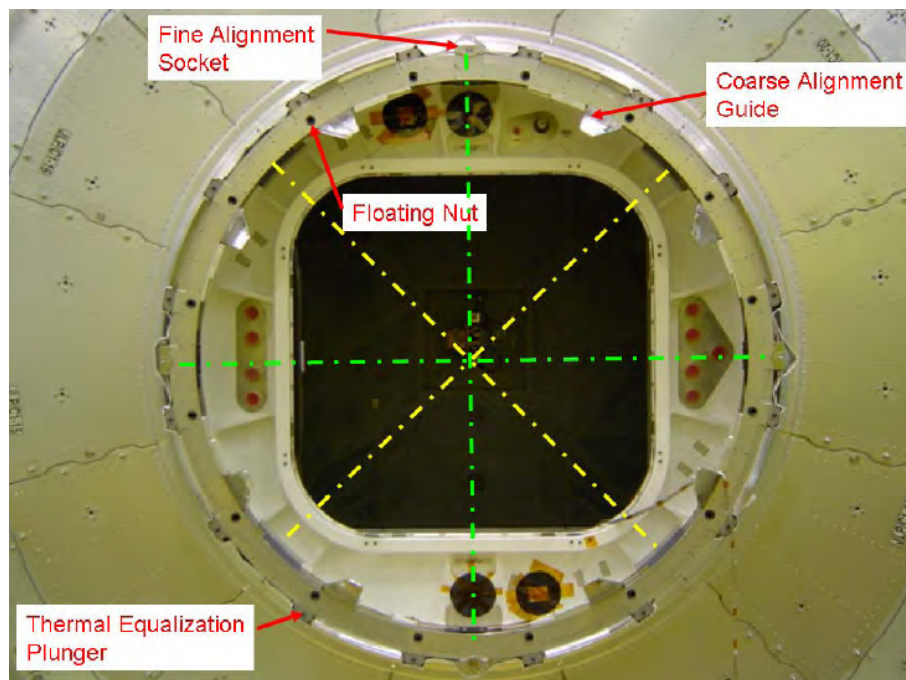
Passive half of the CBM (PCBM) [5]
